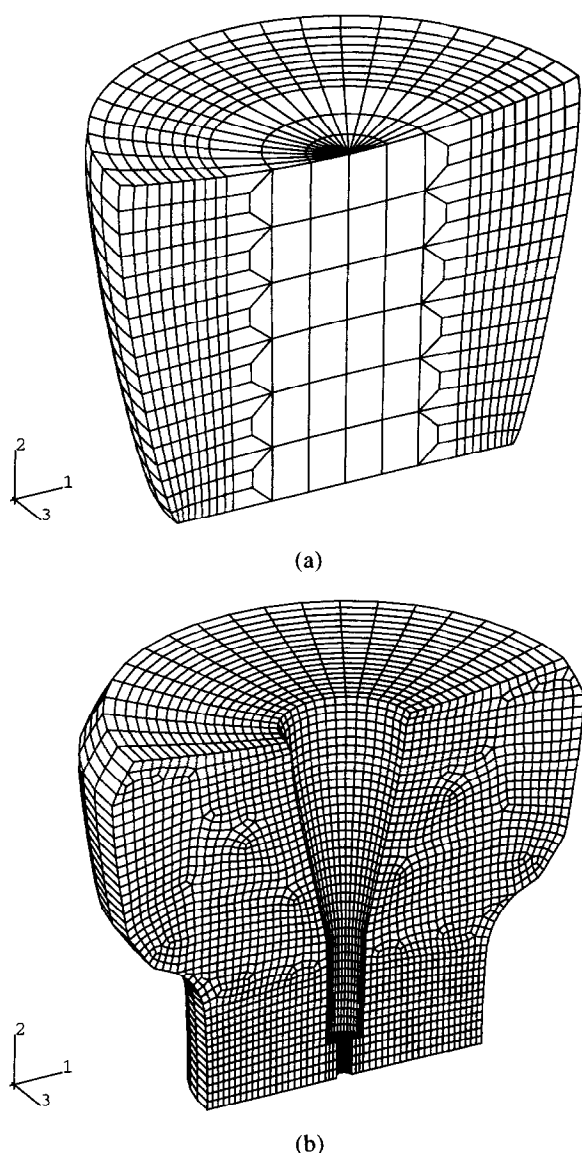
Shape distortions of the machined part of Fig. 7 after sintering compared to those of the sintered cylinder of Fig. 5.
